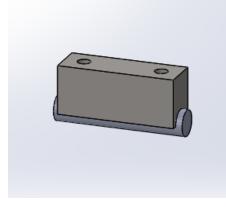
CAD MODEL OF CARBIDE HOLDER
